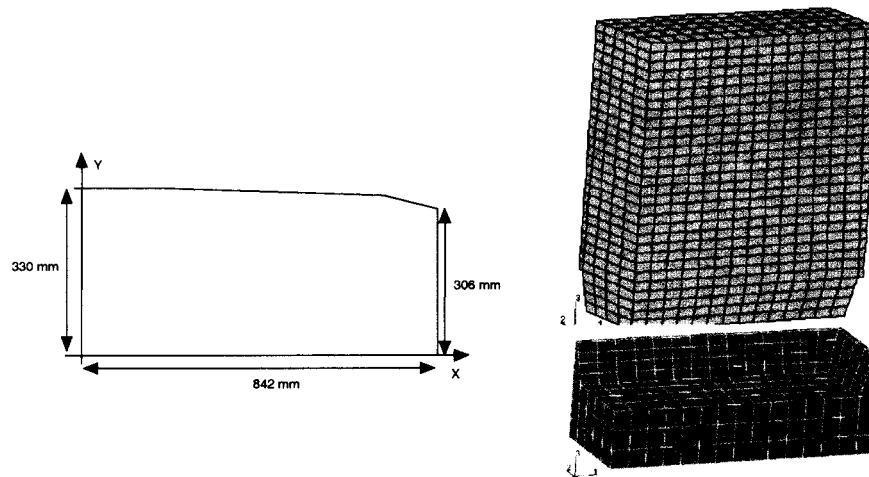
Mold dimensions and enmeshment of ingot and bottom block
